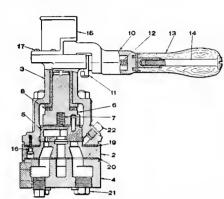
Motorman's Straight Air Brake Valve, Type SX-2.
